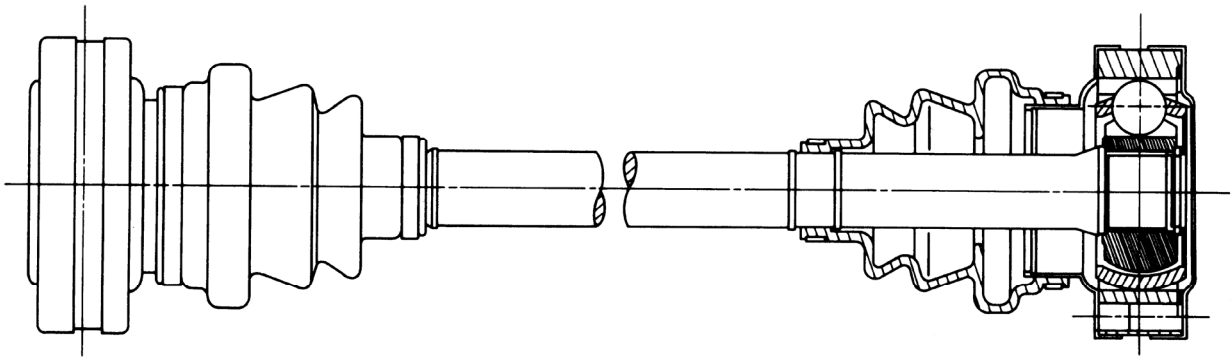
TYPICAL REAR-WHEEL-DRIVE HALFSHAFT WITH END MOTION UNIVERSAL JOINTS
